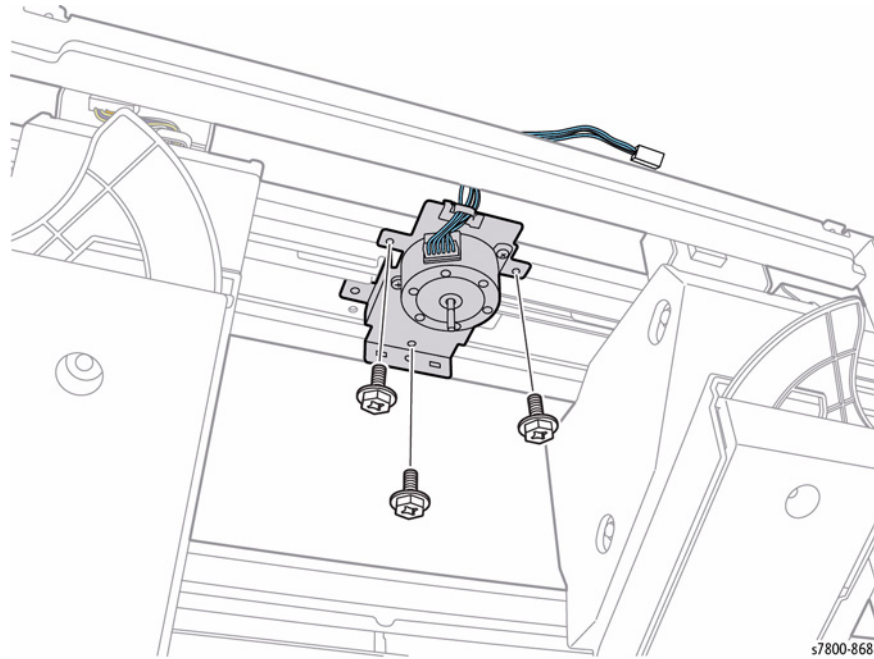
Removing the Booklet Maker Stapler Motor Assembly
